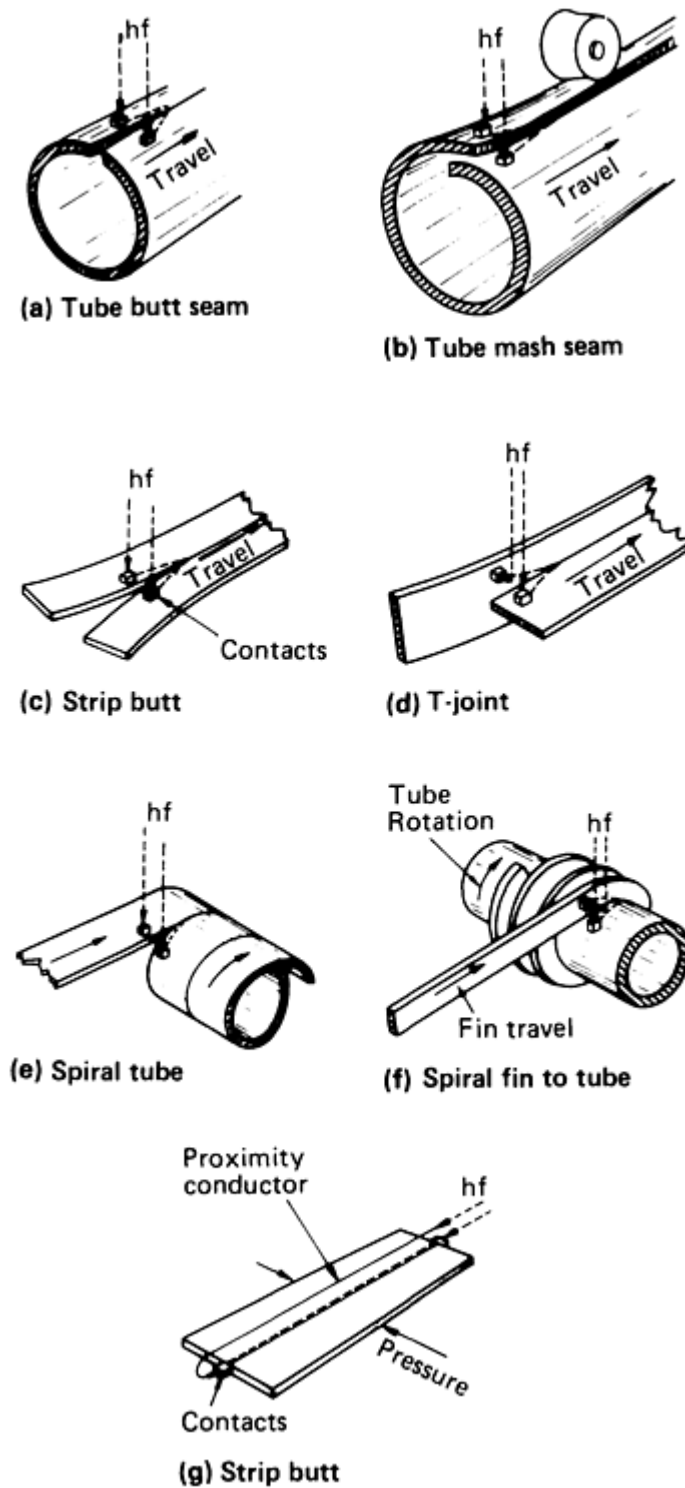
TYPICAL HIGH-FREQUENCY WELDING APPLICATIONS USED TO JOIN PLATES AND TO FORM TUBES
